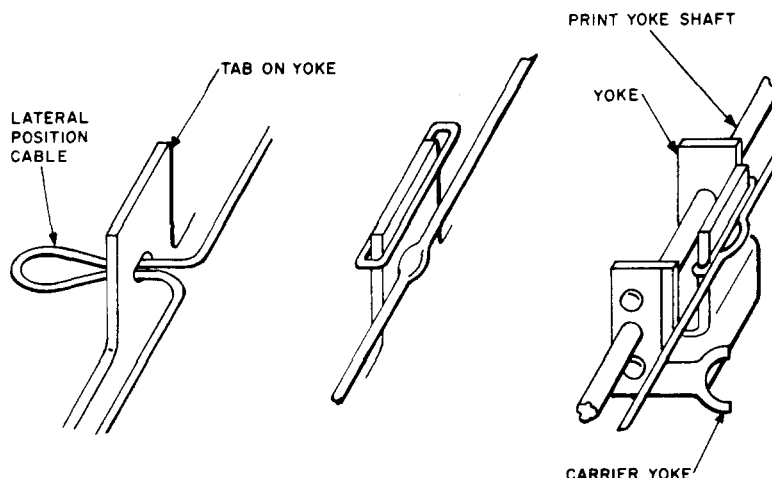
Method of Attaching Lateral Position Cable to Carrier Yoke
